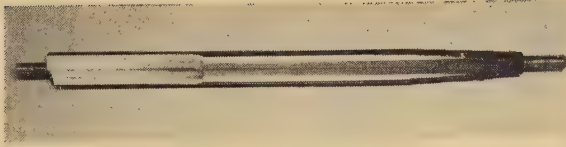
Solid-type bushing with section of insulation removed to show contamination
